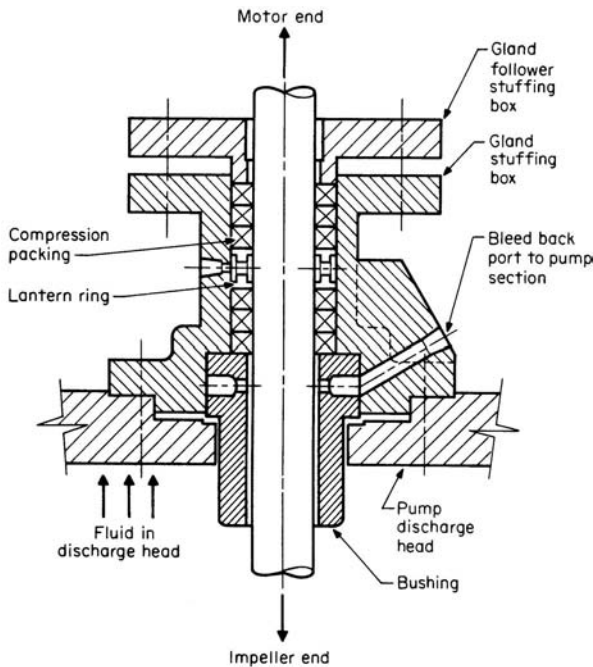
Seal cage or lantern ring. (Courtesy of Crane Packing Co.)
